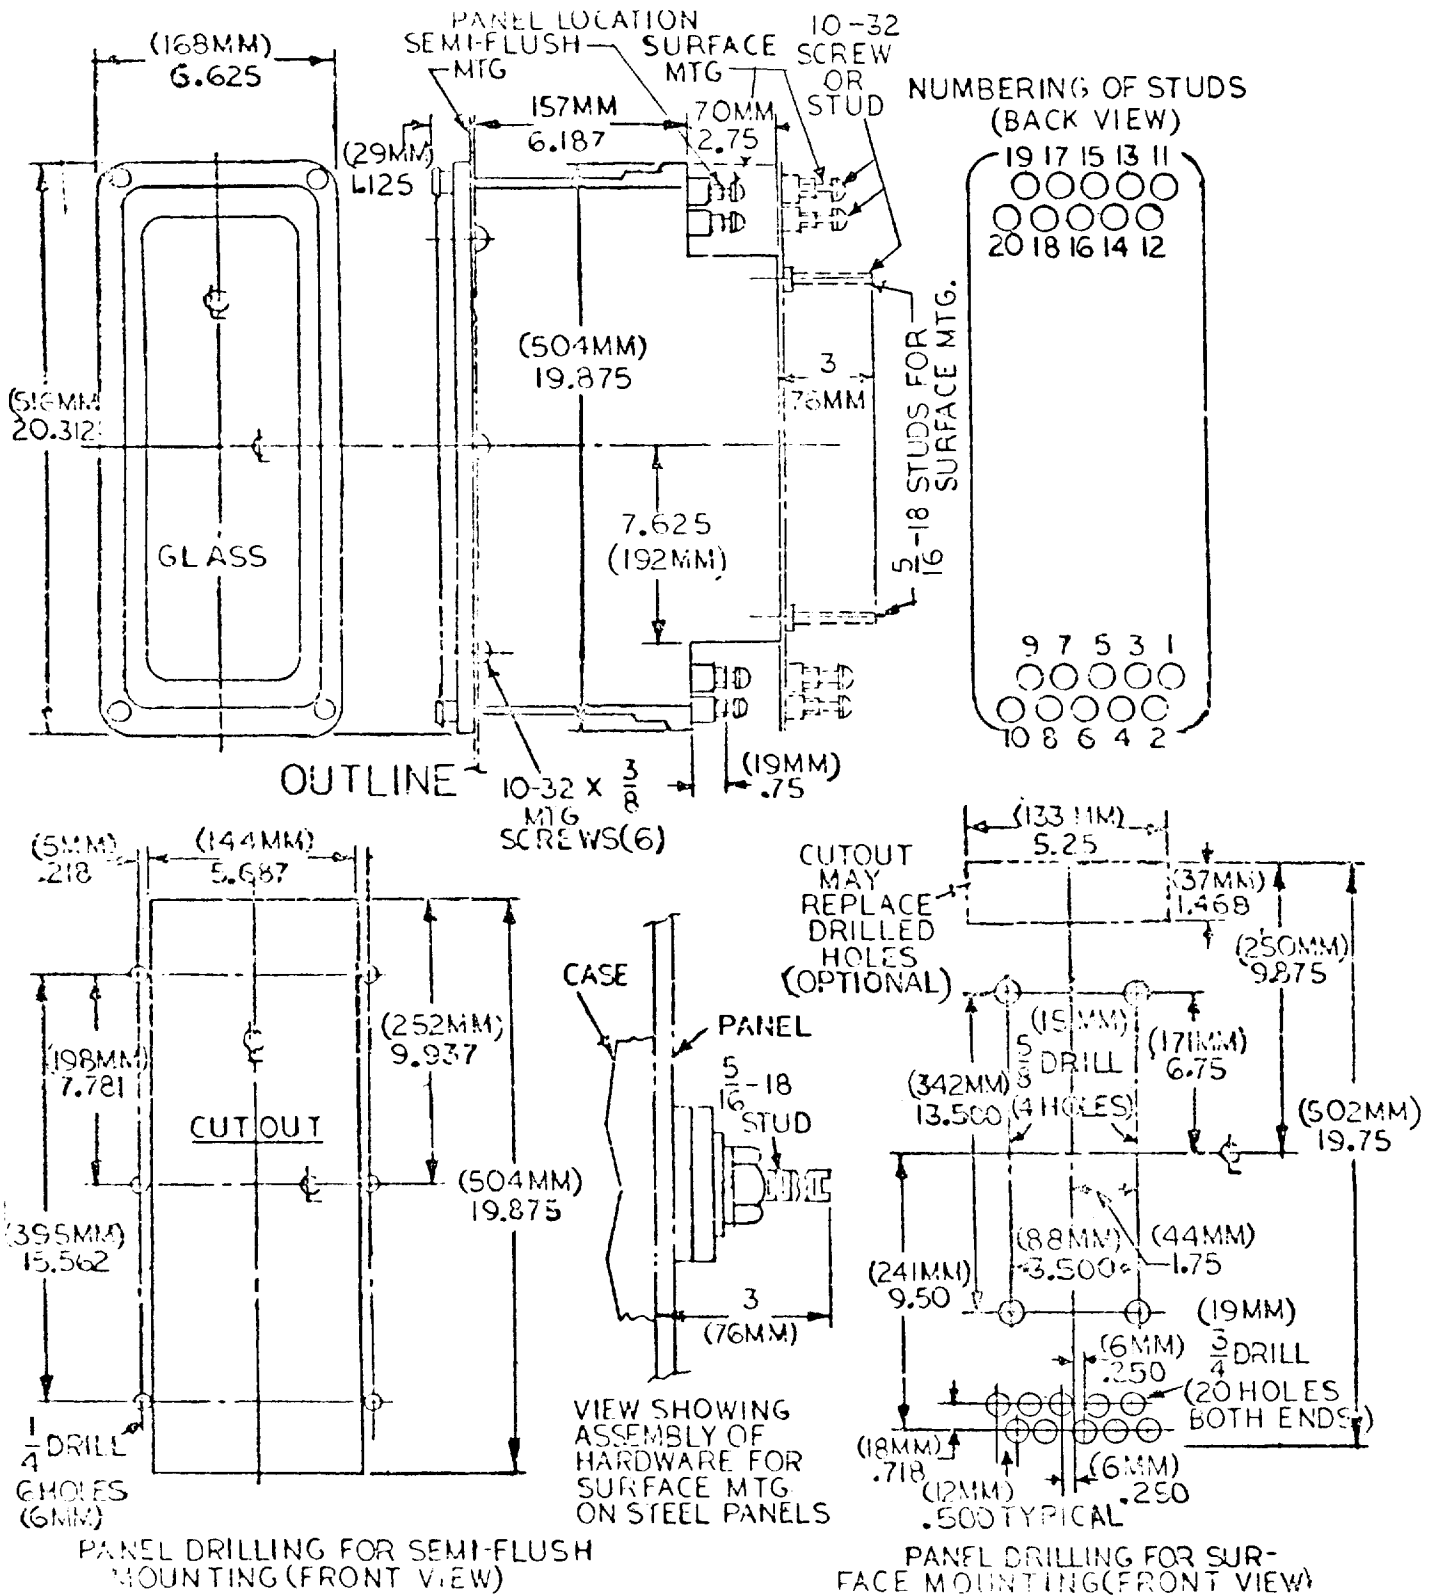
(0178A7336-4) Outline And Panel Drilling Dimensions For The CEH52A (L2-D Case)
